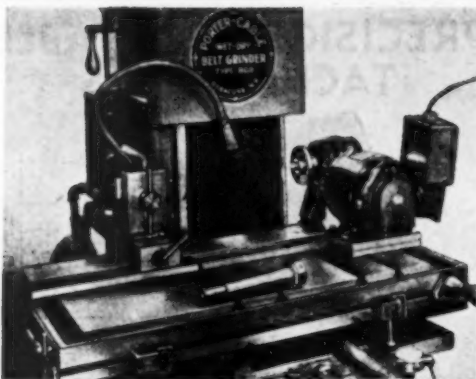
Cylindrical sections of parts can be ground on an abrasive-belt machine by means of a motor-driven fixture equipped with centres for mounting the work.
